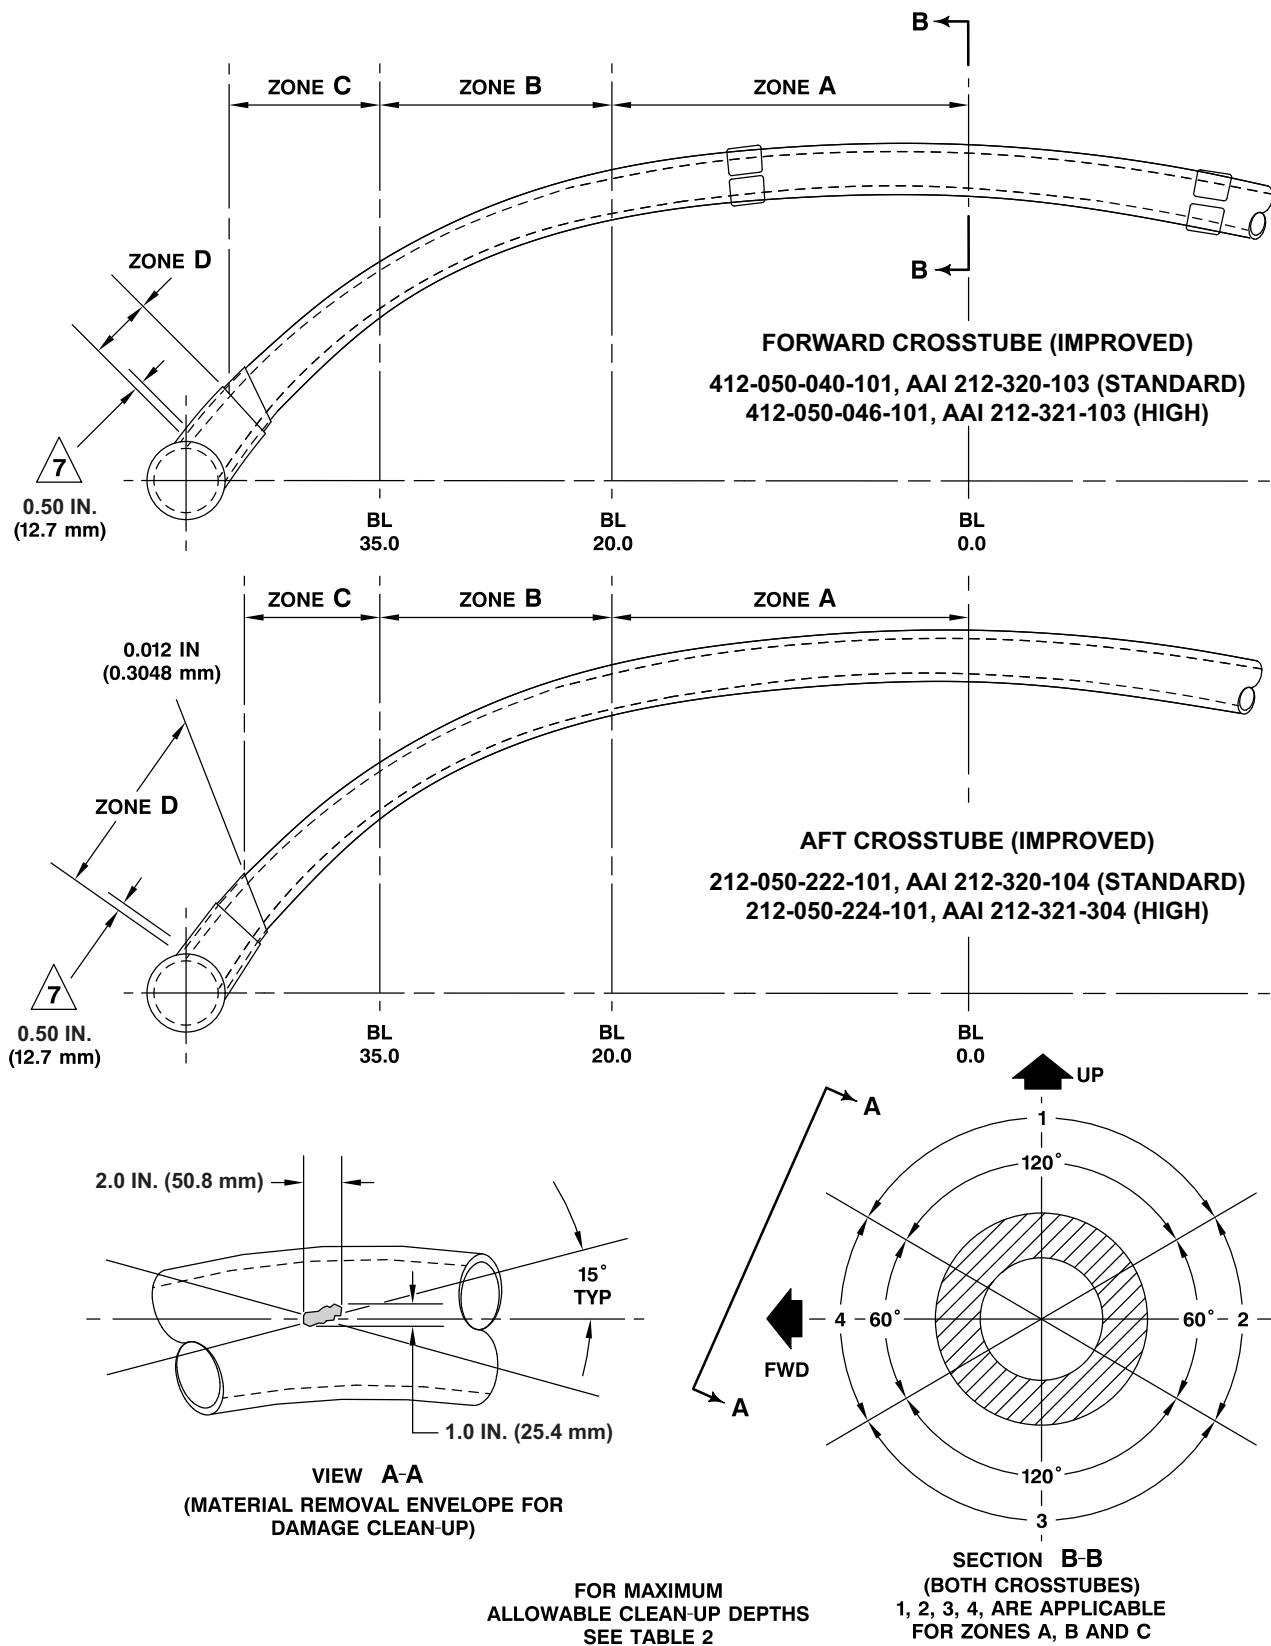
Landing Gear Assembly and Attaching Parts — Damage Limits (Sheet 8 of 9)
